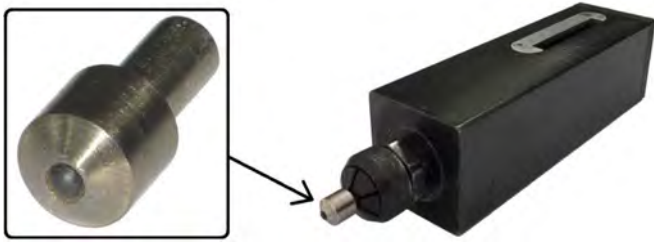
Diamond burnisher (spherical cups) with tool holder and working parts.
